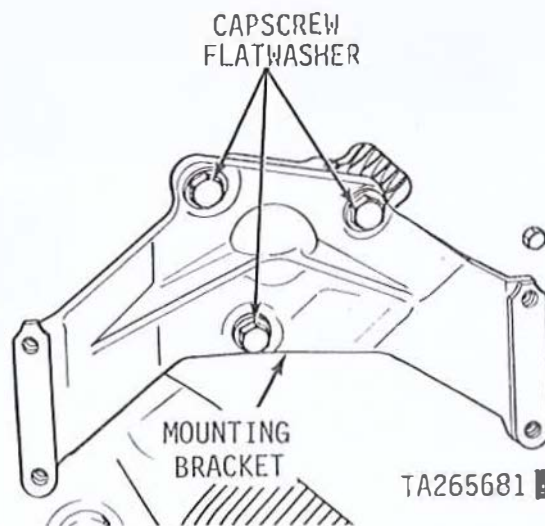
Removing or installing fuelheater separator filter mounting bracket.
